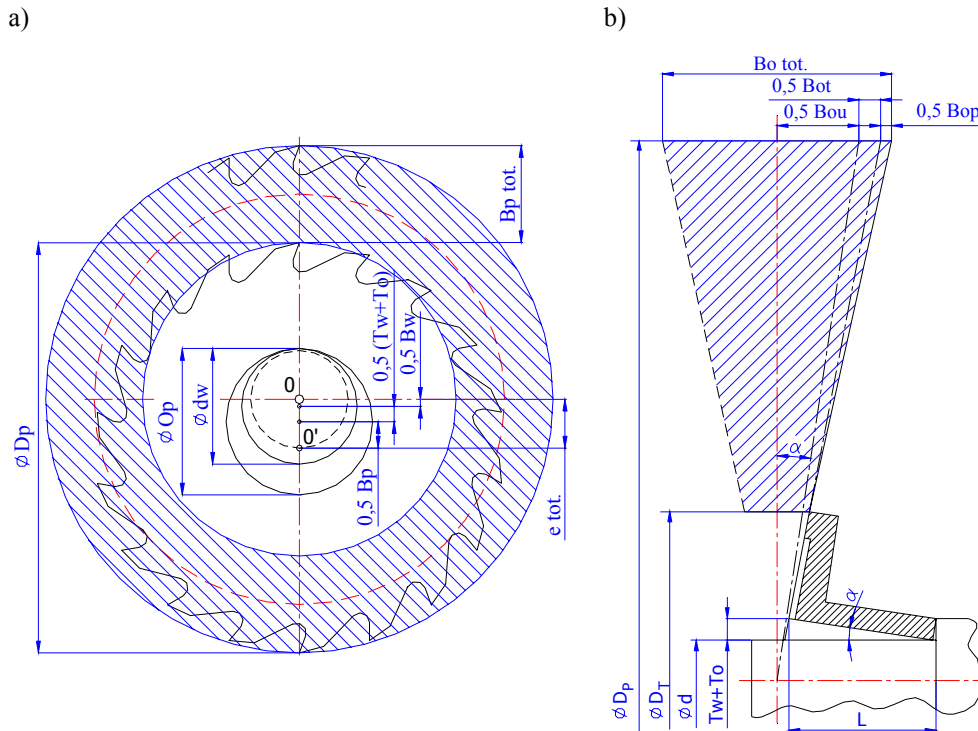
Circular saw teeth position for collar clamping system on the spindle: a) tooth radial run-out, b) tooth axial run-out
